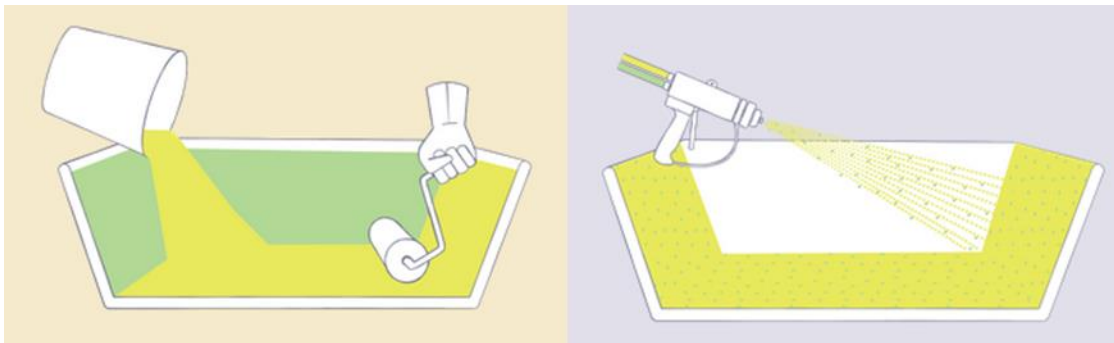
Open molding methods includes hand layup (left) and spray-up (right) [8].
